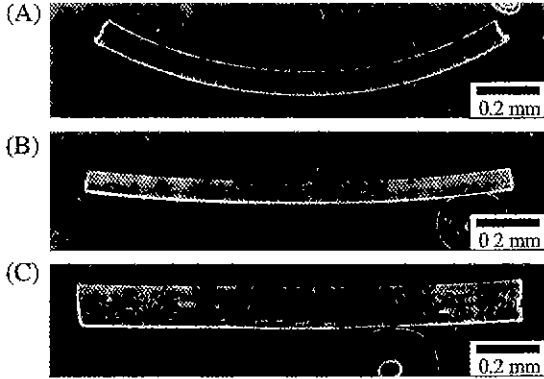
Photographs of multilayer specimens prepared by tape casting with ZT and SUS: (A) 16 thin layers sintered with pressureless sintering, (B) 16 thin layers with pressure sintering and (C) 16 thick layers with pressure sintering.
